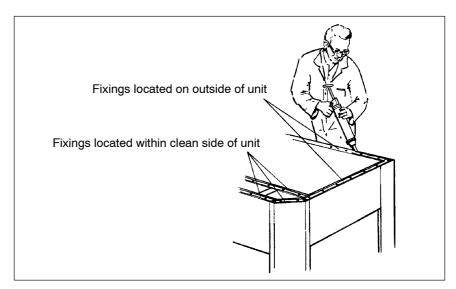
Applying aperture sealant to base section joint flange/outlet weather cowl option
